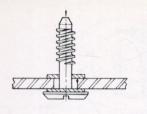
Here is shown another type of quick-release fastening system, the Southco No. 11 Adjustable Pawl Fastener. Note coiled spring to retain pawl in any position and the pawl stop which positions pawl at desired point of engagement. Pawl engages bead rolled on edge of panel or door opening.
